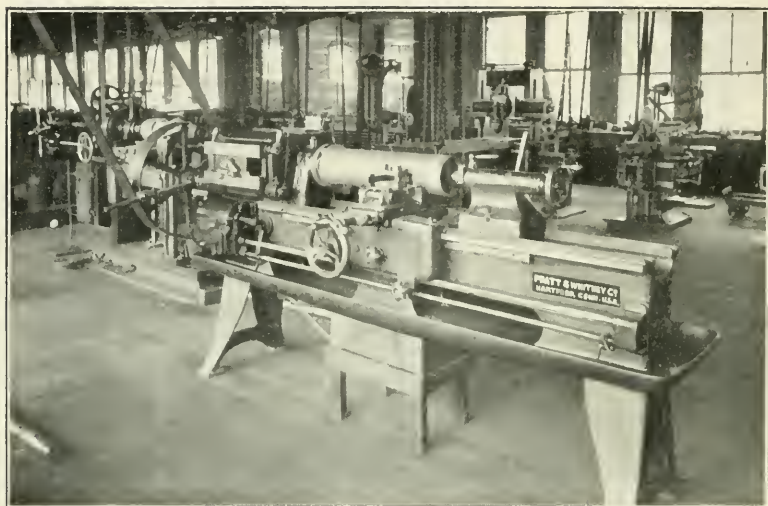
LATHE USED IN TESTS WITH HIGH-SPEED TOOL STEELS
